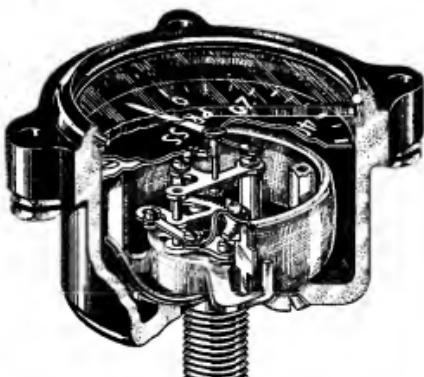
Mechanism of Bourdon tube type pressure gauge
